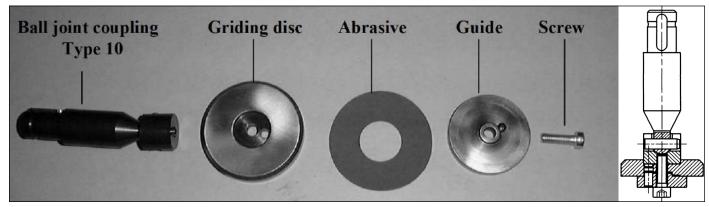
TOOL COMPONENTS FOR HAND-HELD OPERATION WITH BALL JOINT COUPLING TYPE 10 (SOLID GRIND-ING DISC WITH GUIDE)
